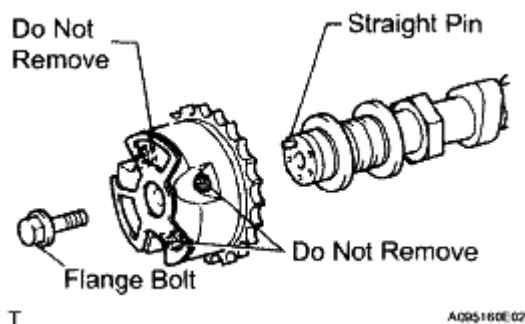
Identifying Flange Bolt & Camshaft Timing Gear
